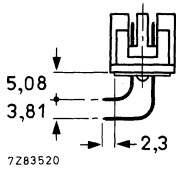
Male part with 90° angled dip-solder pins; dimensions are identical with those in Fig. 2, except as shown.
